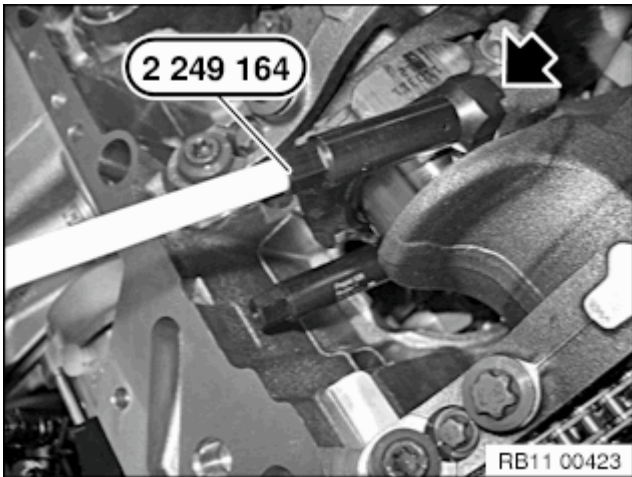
Connecting Crankshaft Journal And Connecting Rod And Removing Special Tools 22 49 164
